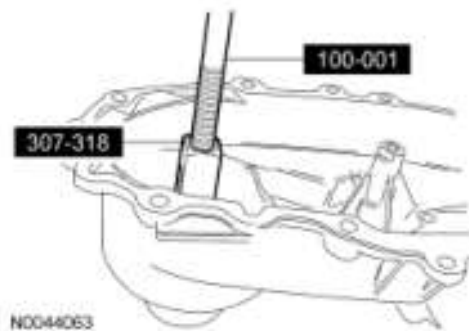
Removing Bearing Using Stator Bearing Remover With Slide Hammer
